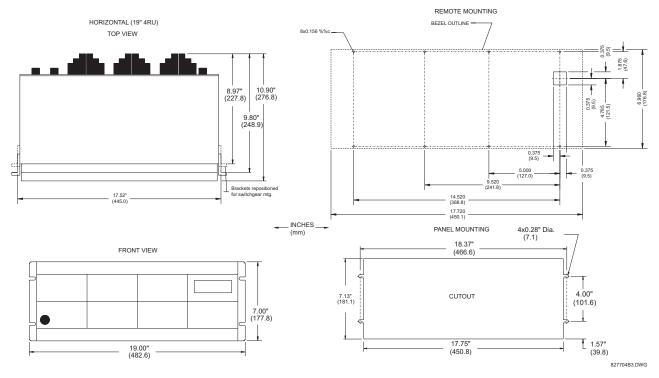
F60 HORIZONTAL MOUNTING AND DIMENSIONS
